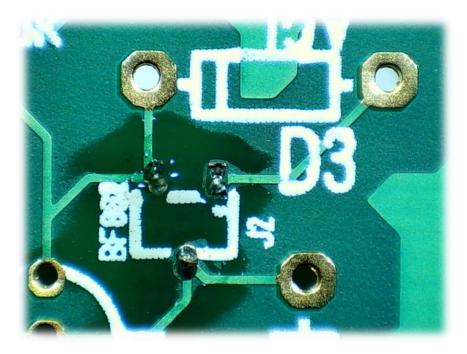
Soldering SMD FET, pads soldered (Rev06 picture)
